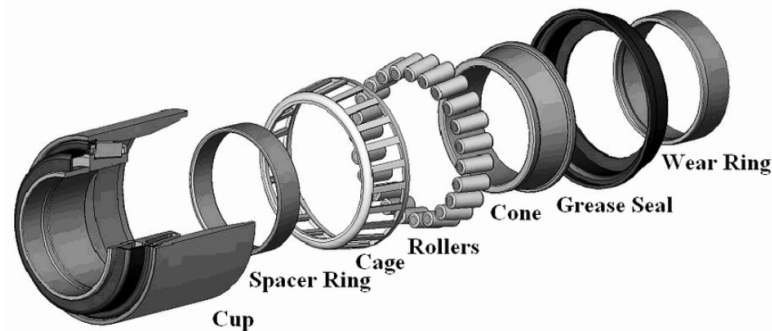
Exploded view of a railroad tapered roller bearing assembly [6].
